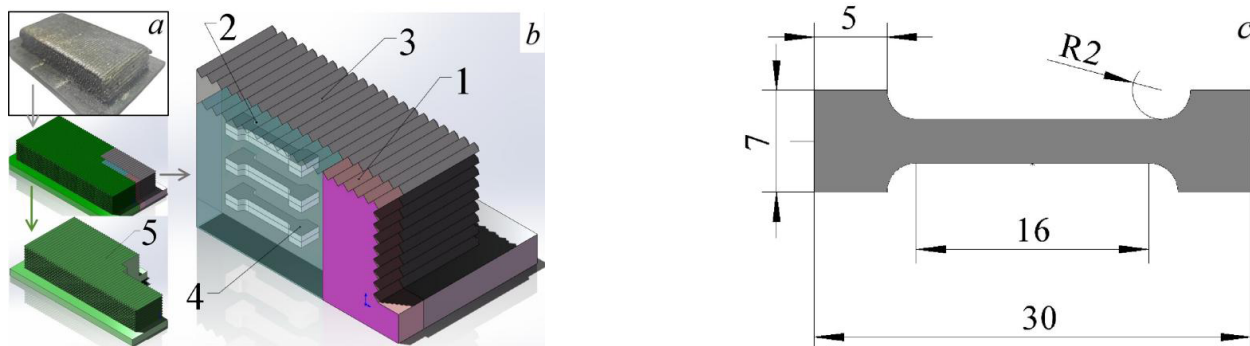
Photograph of the WAAM-fabricated specimen (a), samples cut from the specimen (b), dimensions of 2 mm thick dog bone specimens, mm (c):
